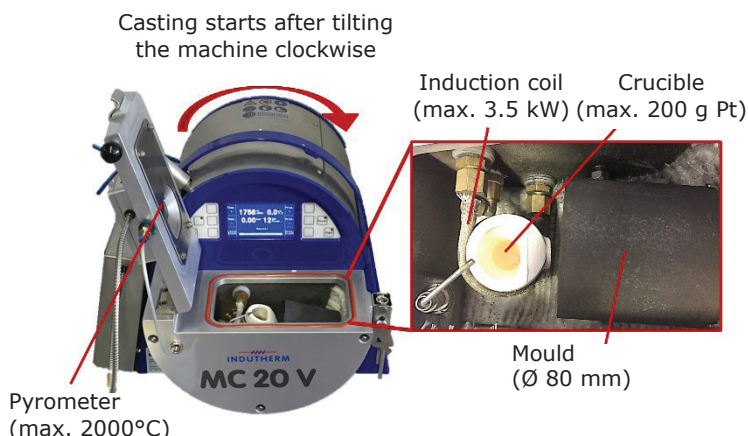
Casting machine MC 20 V (Indutherm GmbH, Germany)
